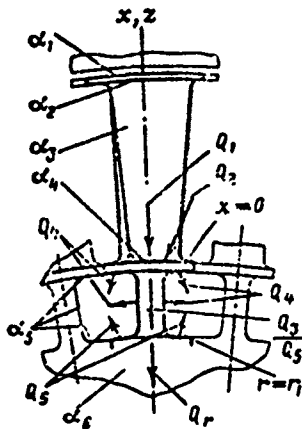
Schematic drawing of a shrouded solid rotor blade with root, positioned on a turbine disk:
